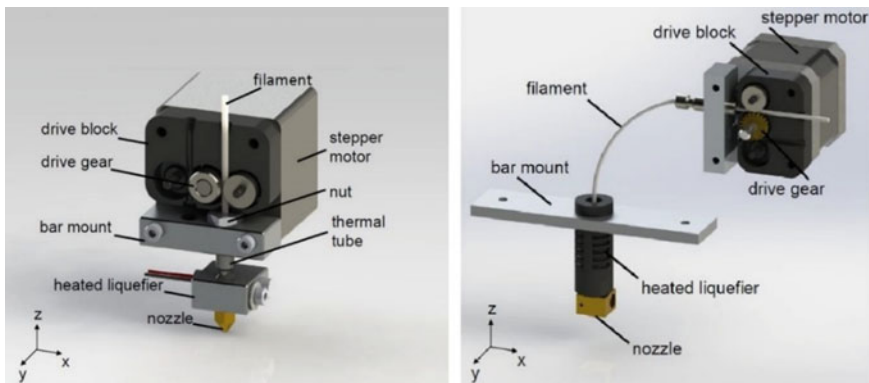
a Direct extruder type Nozzle system and b Bowden Extruder type Nozzle system [12]
